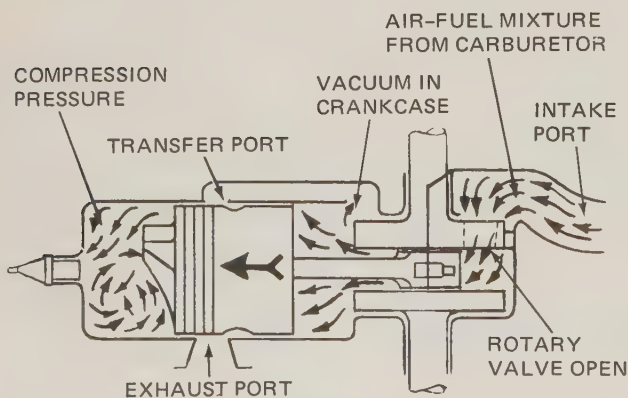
As the crankshaft rotates, the valve port in the crankshaft lines up with the inlet port in the crankcase to admit the air-fuel mixture to the crankcase.
